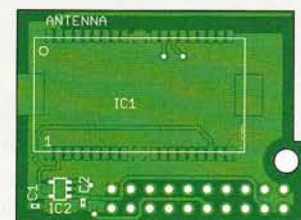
The Bluetooth PCB uses a length of PCB track as a 'printed' antenna.
